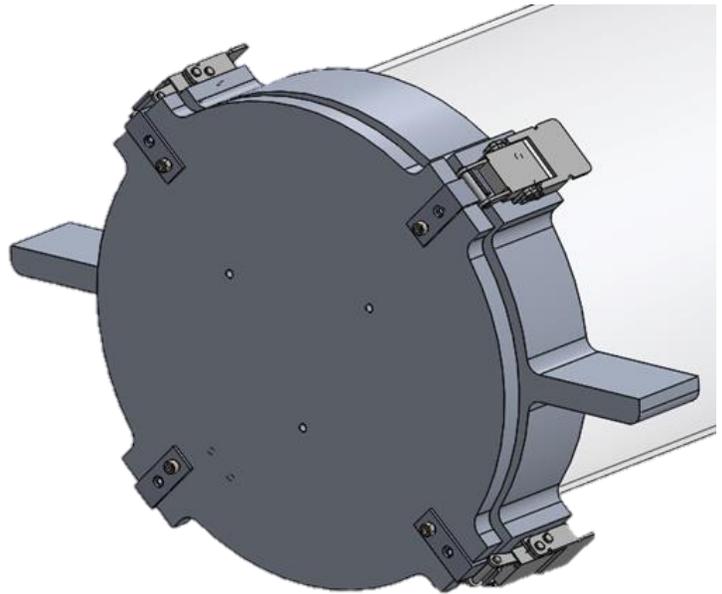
Solidworks model of the rear endcap with latch mechanisms
